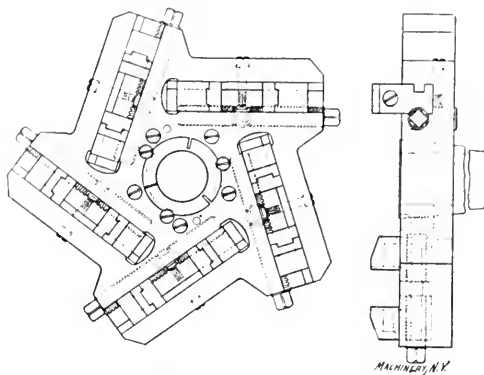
Face Plate and Chuck Jaws for Holding Work.
